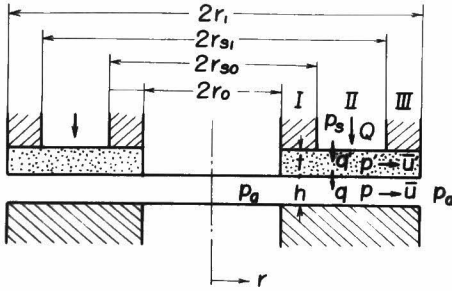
Schematic diagram of thrust collar gas-bearing with full porous surface
